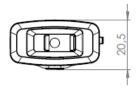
Photonfy mechanical dimensions. All dimensions are in millimeters (mm)
